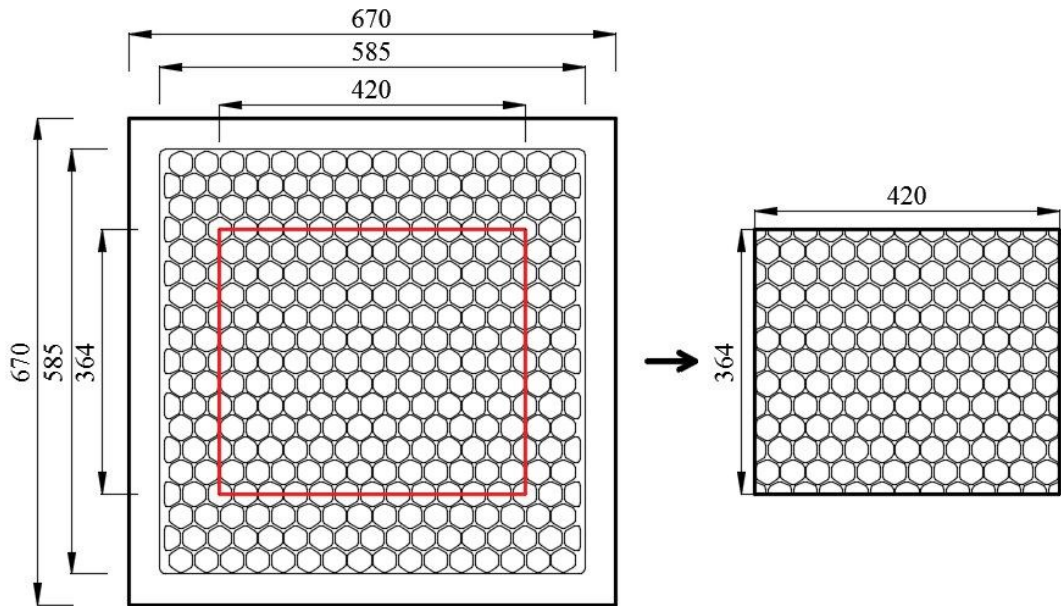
Dimensions of original plate and cut (red line) structured plate
